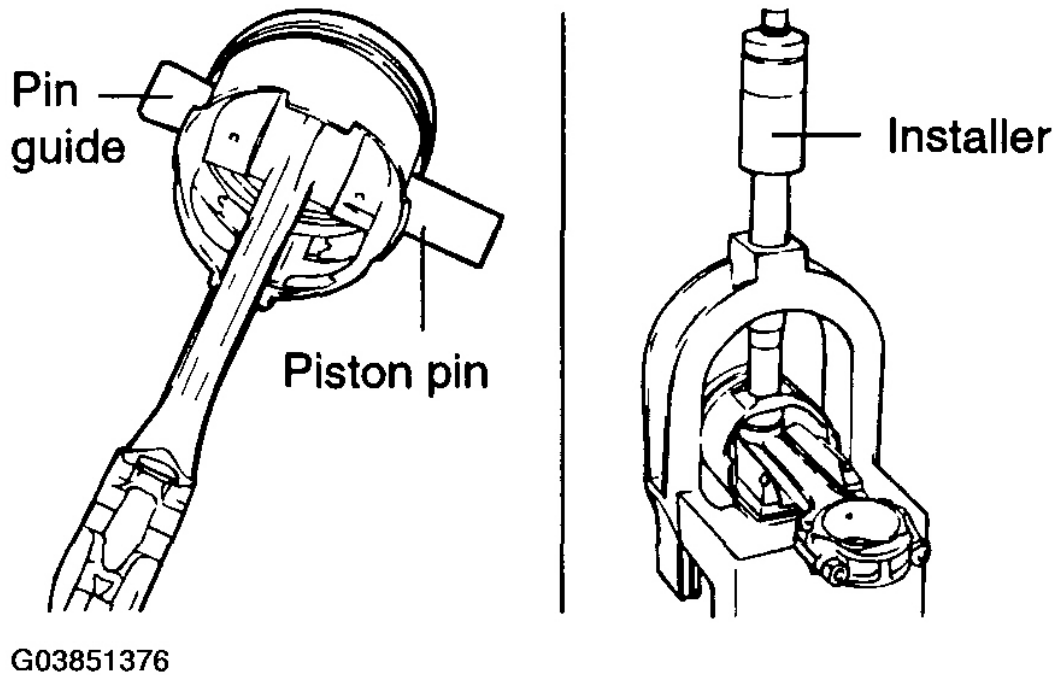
Installing Pin Guide Through Piston And Into Connecting Rod
